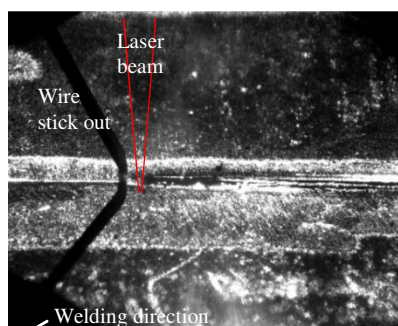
Laser cold wire welding process observed with high speed camera
